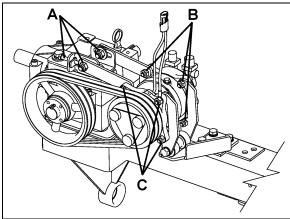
COMPRESSOR REMOVAL OR INSTALLATION
